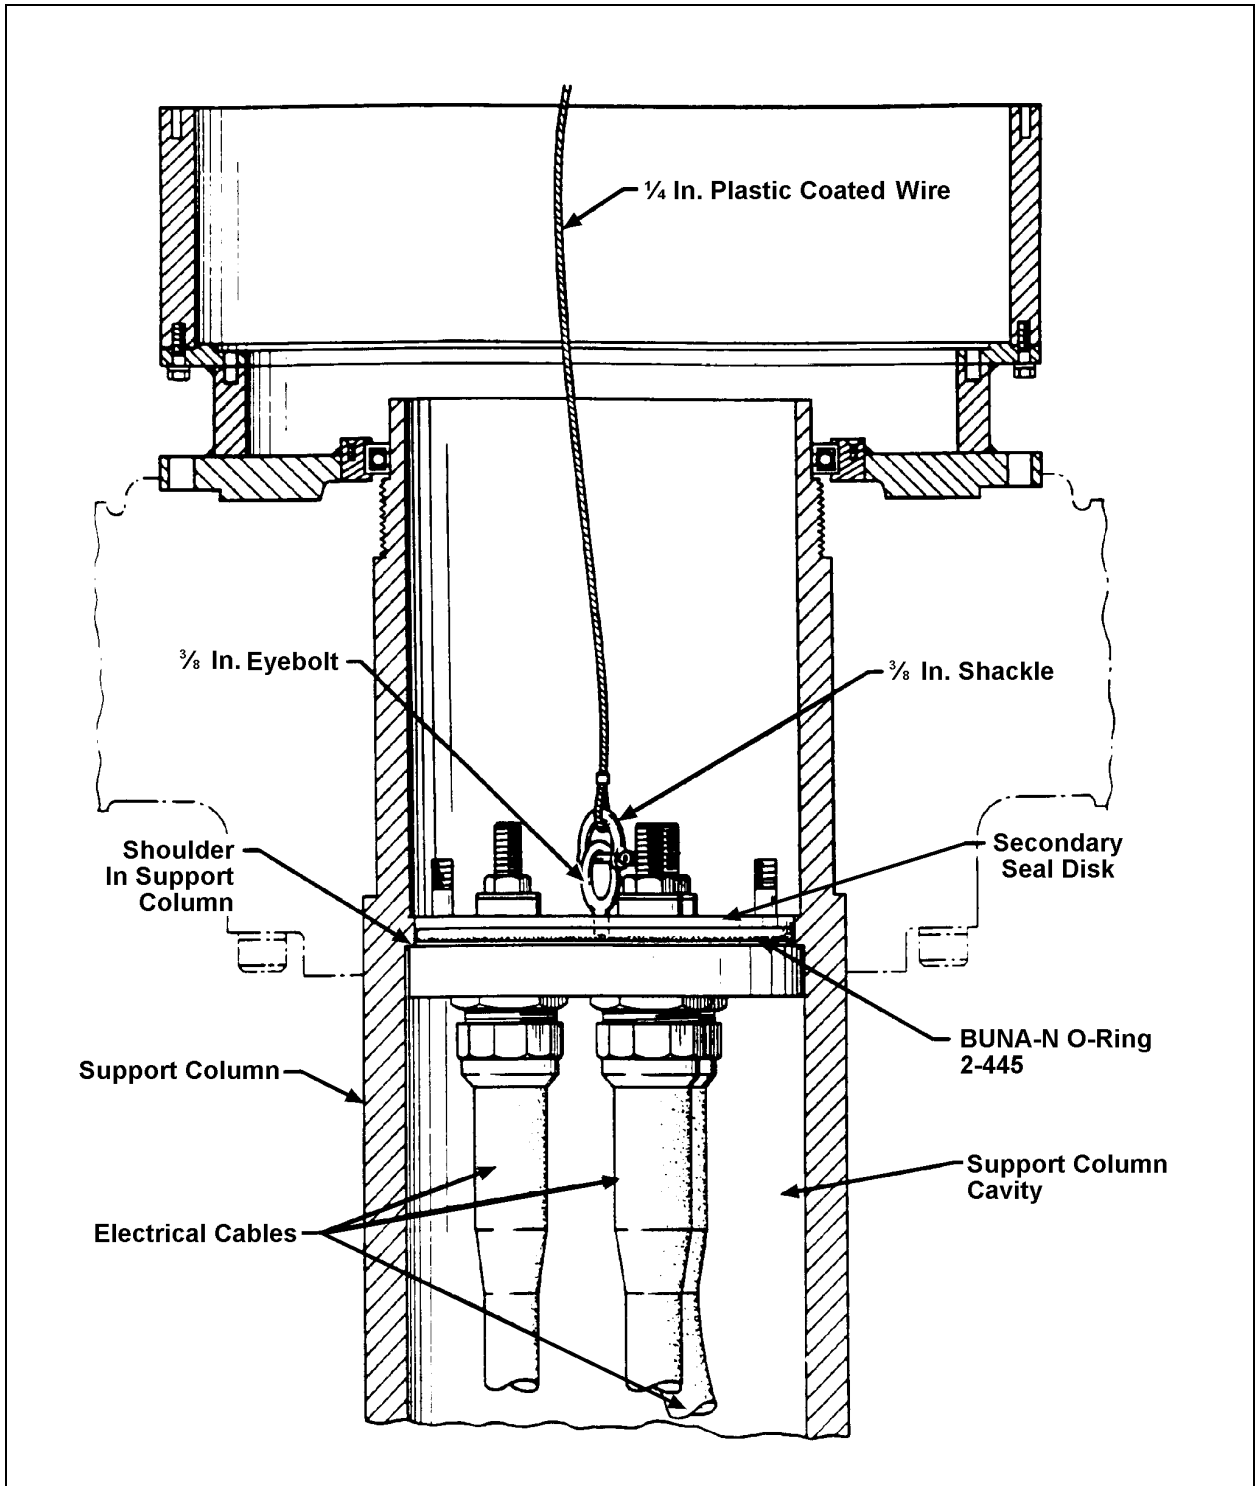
Attachment of Boat Winch Wire to Secondary Seal Disk.
